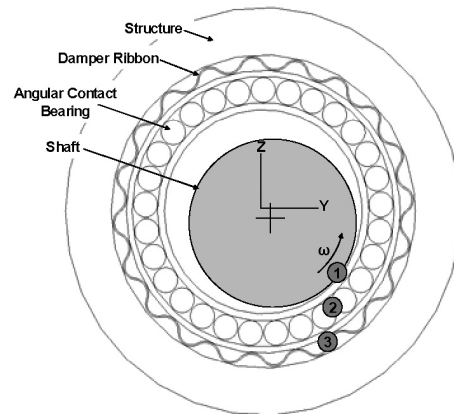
Auxiliary Bearing Assembly. (S2M Patent)
